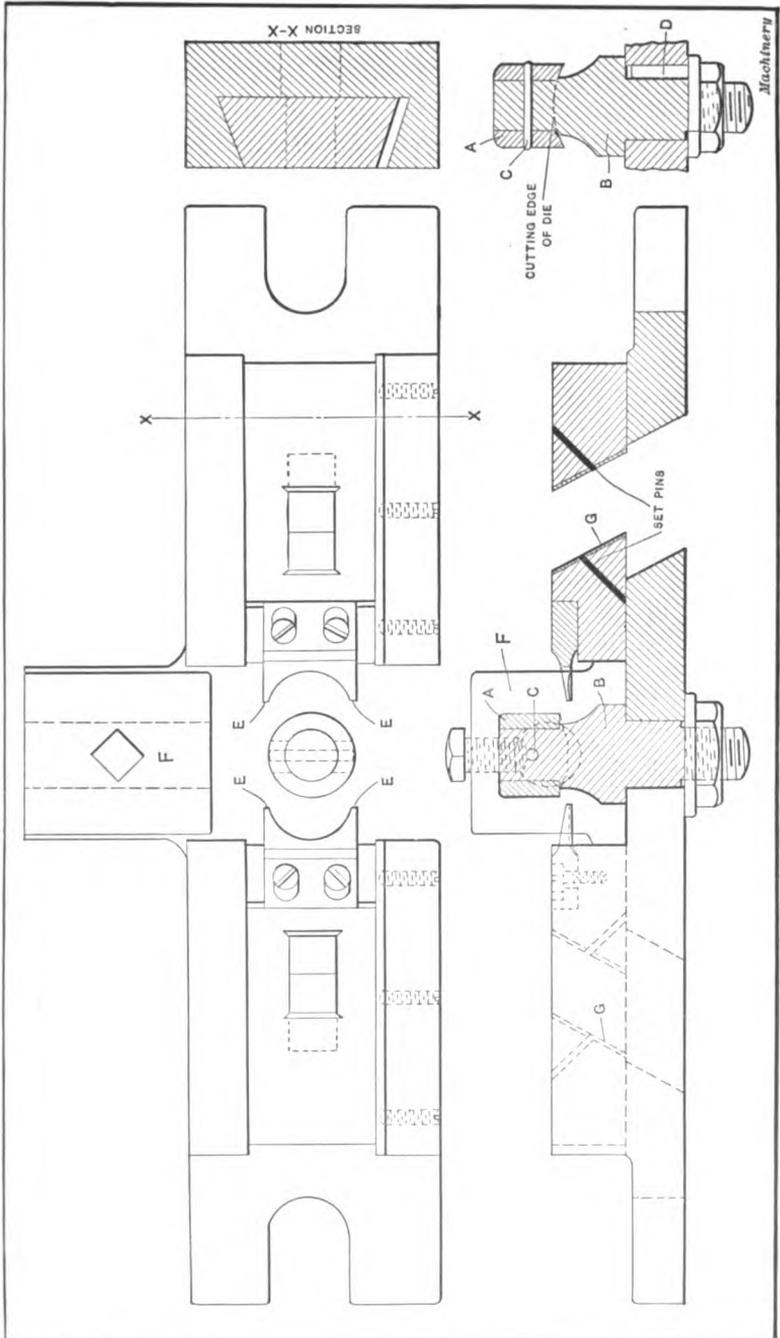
Die-bed equipped with Tools for clipping Shell shown in Fig. 24
